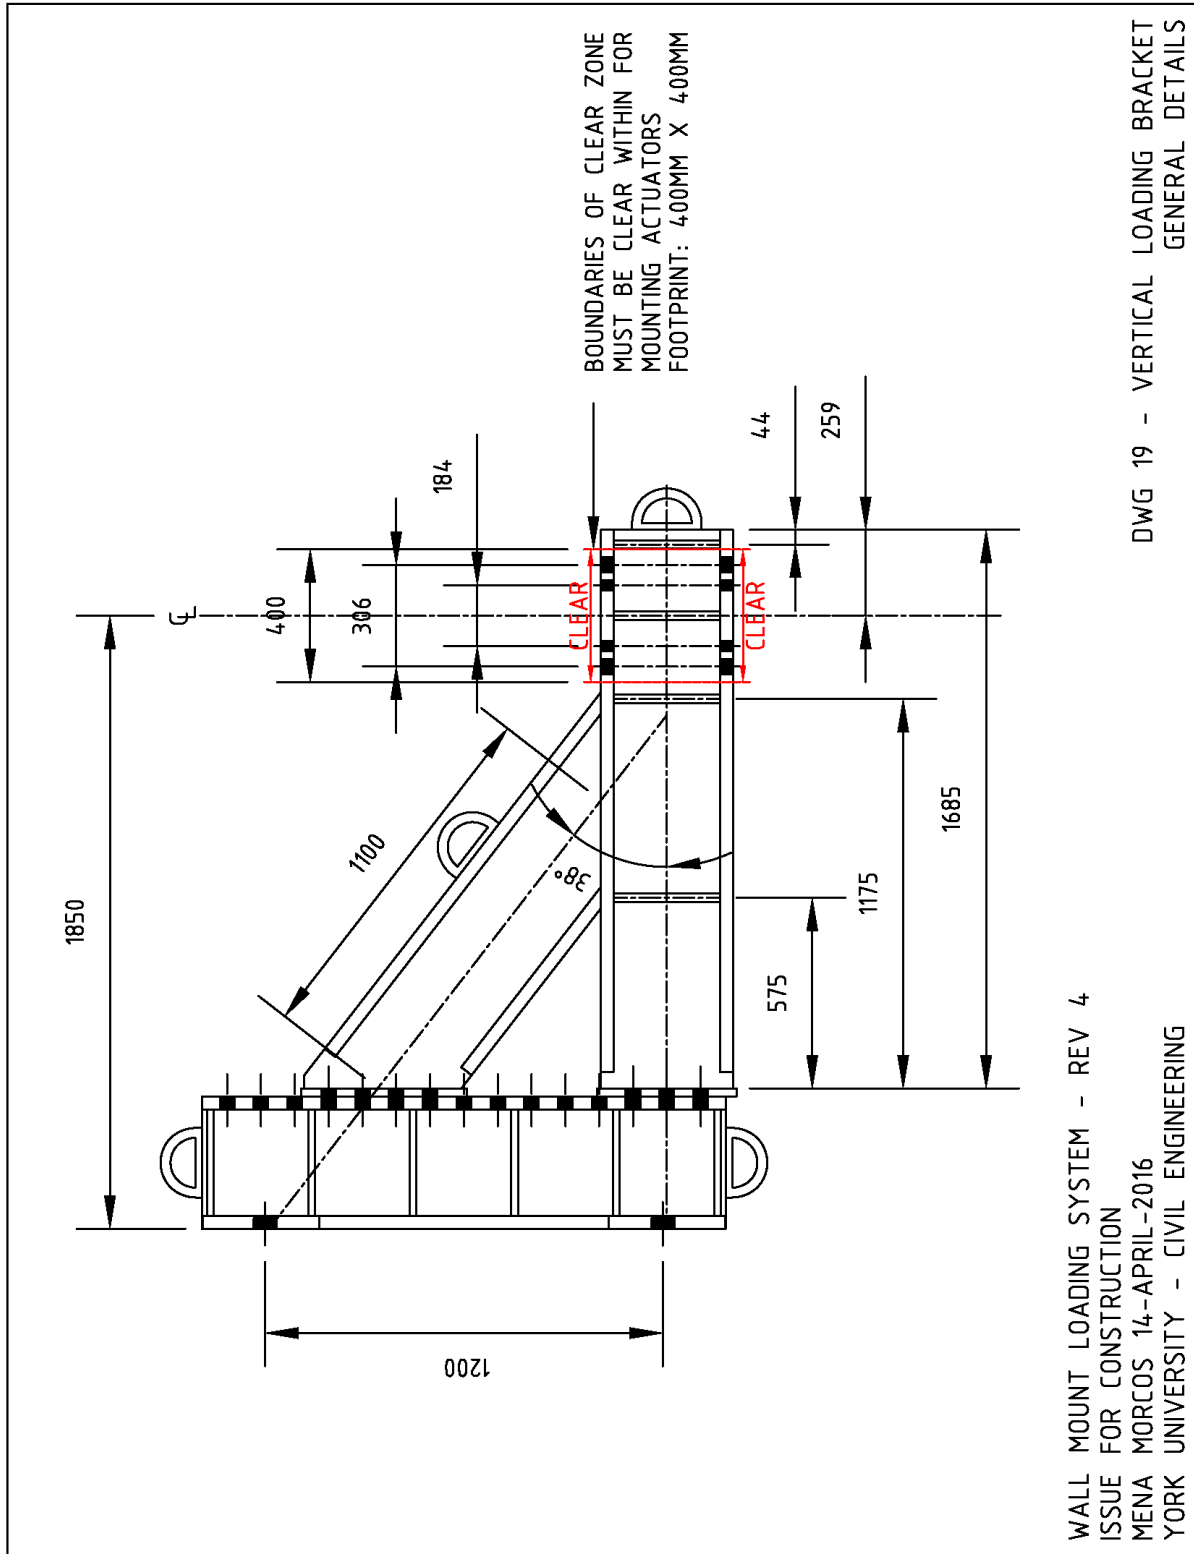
Wall mount loading system design and fabrication drawing – Drawing 19.
